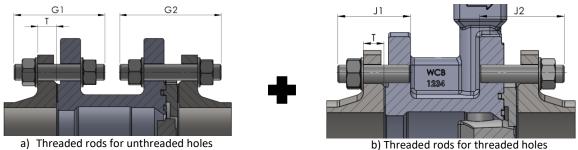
Dimensions of fasteners for valves with DF (Double Flange) type bodies
